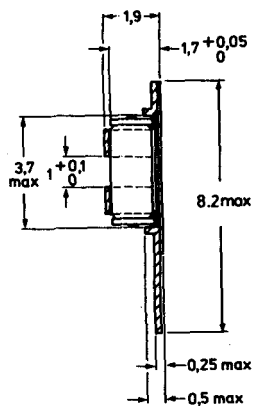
Cross-sectional view of bandolier with SOD-80 devices.
